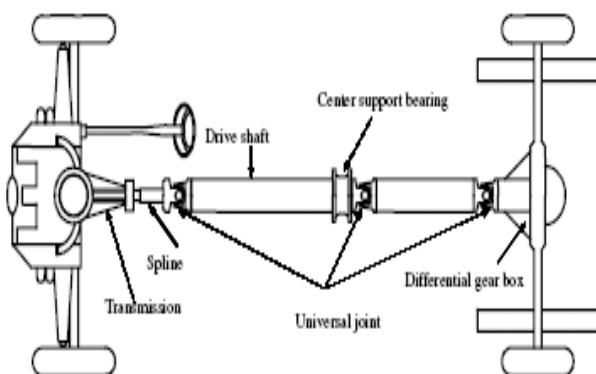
Conventional two-piece drive shaft arrangements for rear wheel driving system
